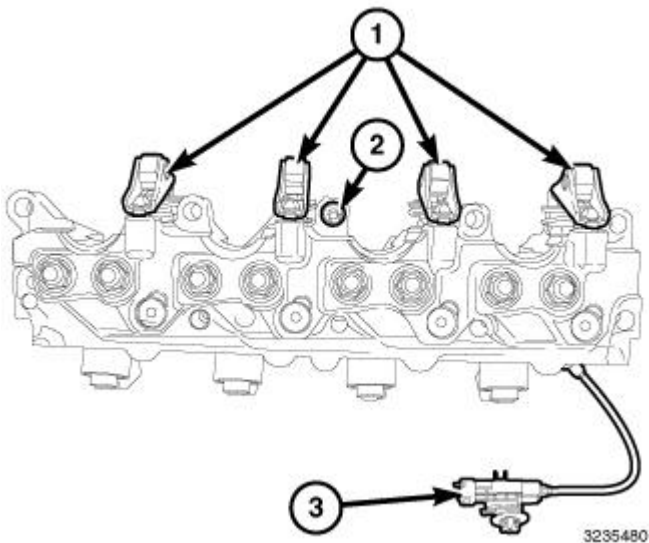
Valve Rocker Arms, Oil Supply O-Ring & Oil Temperature Sensor
